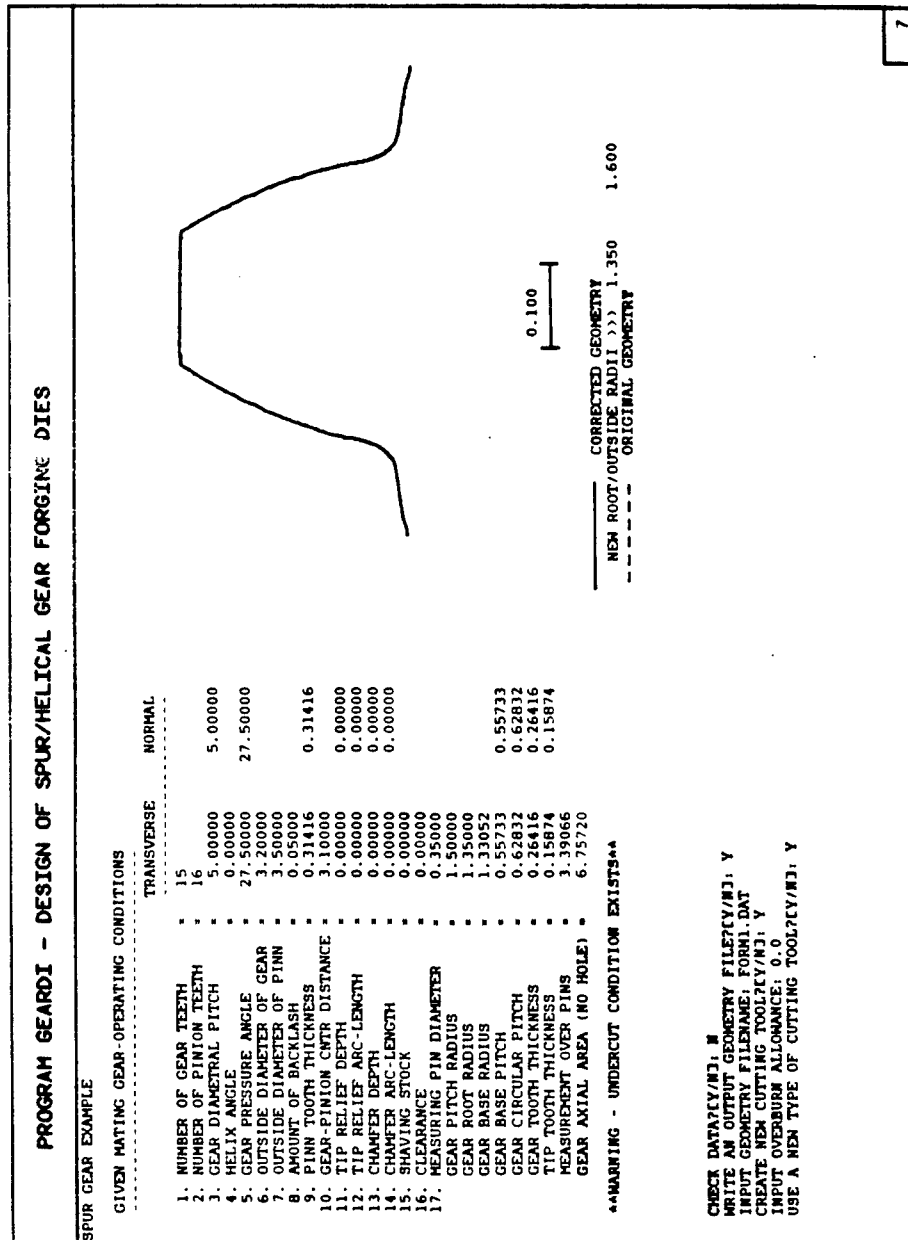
Spur Gear Example; Display of Original and Corrected Tooth Geometries
